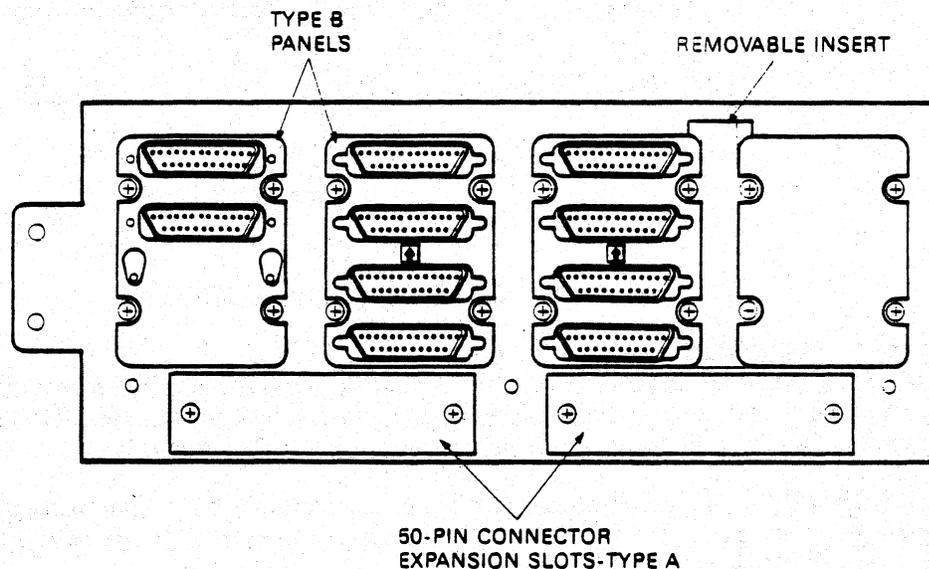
I/O Insert Panels and Adapter Plate (EIA-232-D)
